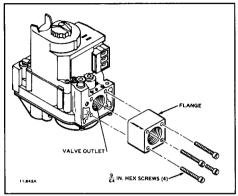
Fasten flange to valve firmly, but do not overtighten screws.
